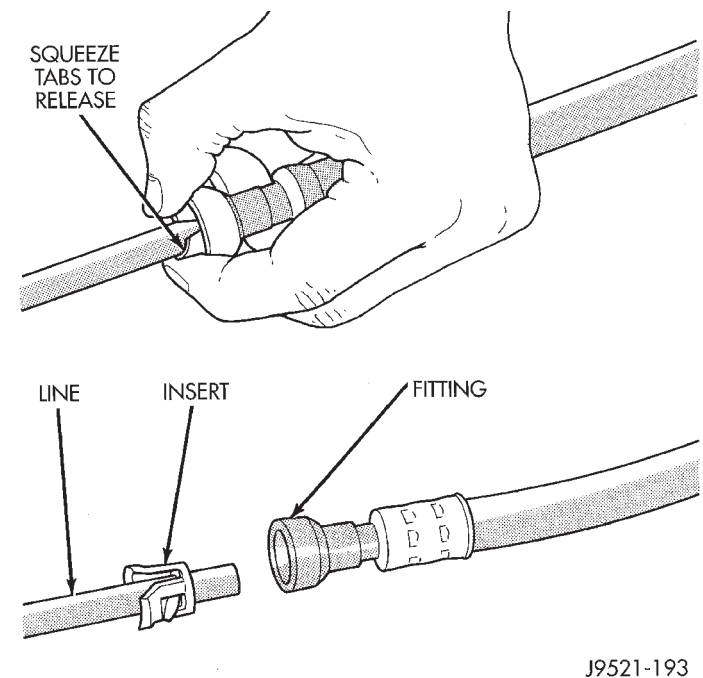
Disconnecting New Style Fitting From Cooler Line
